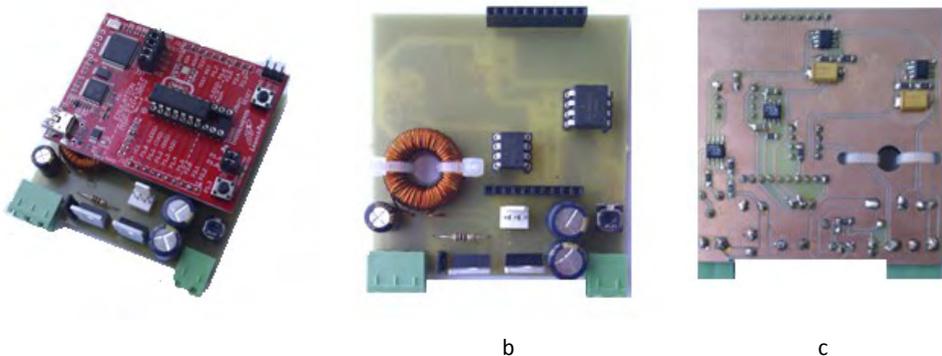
Laboratory assembly: a) LED dimmer controlled by LaunchPAD; b) power board TOP; c) power board BOTTOM
